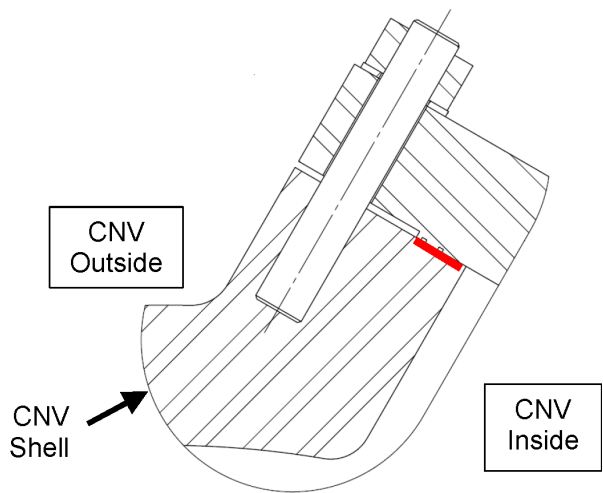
Control rod drive mechanism power (CNV37) flange and cover bolted opening
